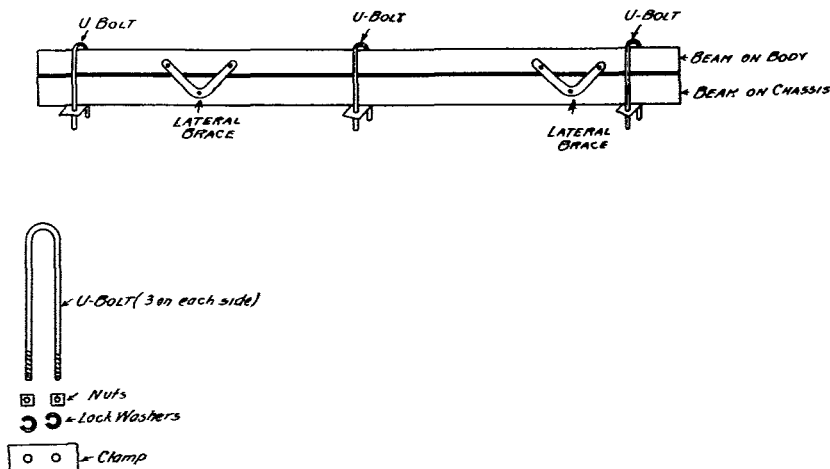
METHOD OF ATTACHING BODY TO CHASSIS
